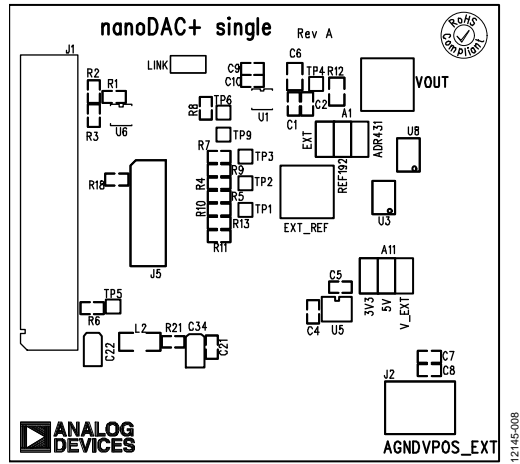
EVAL-AD5693RSDZ Component Placement Drawing
